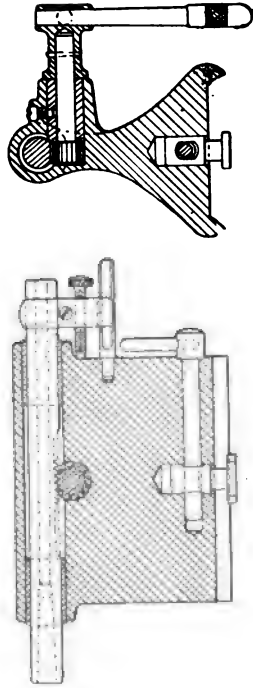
Lever Type of Tailstock for Bench Lathe.
